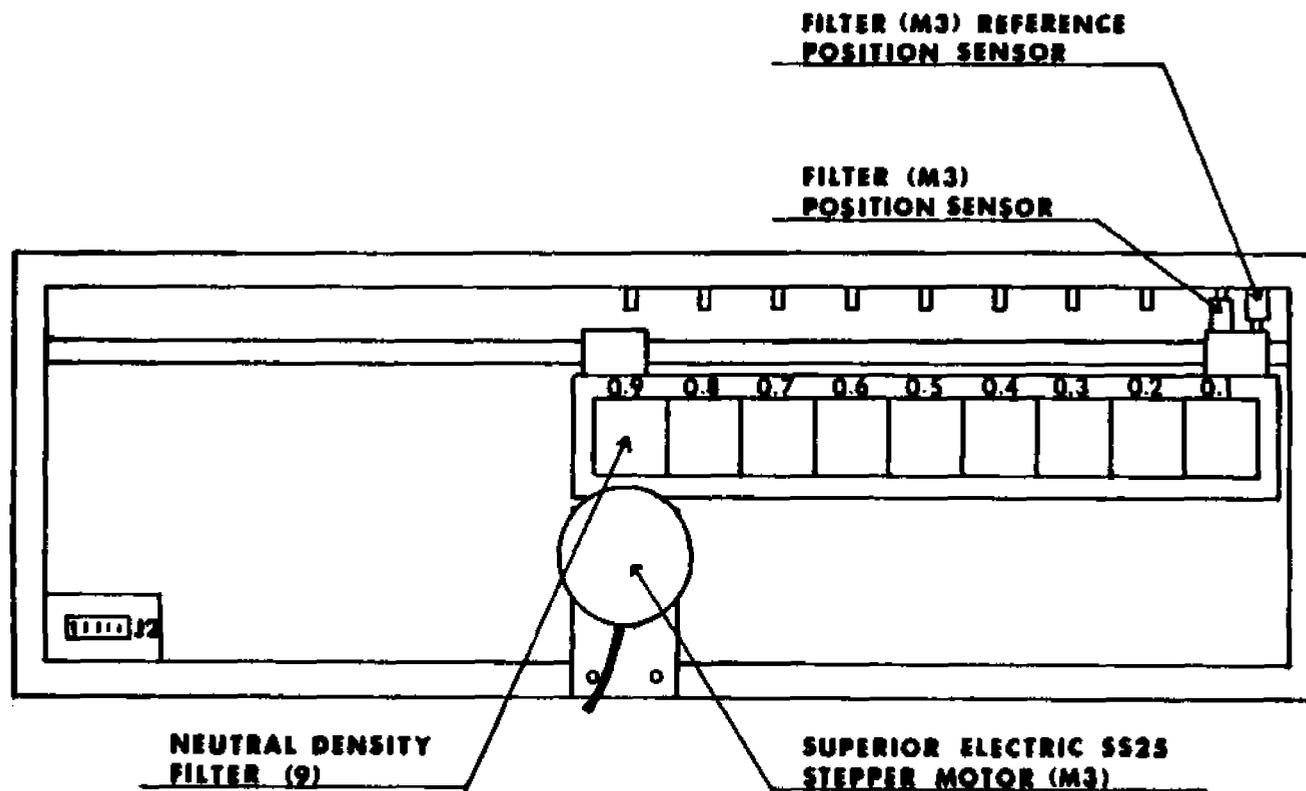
Detail of Visual Presentation Section movable filter assembly (M3 = MOTOR 3).
